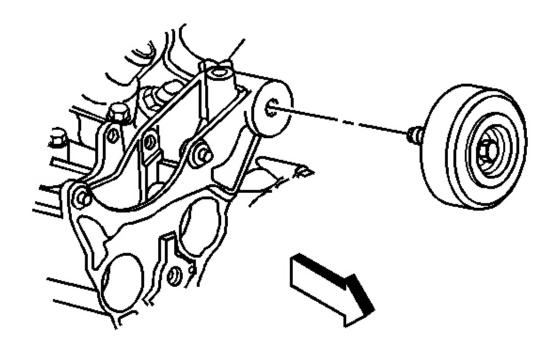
Drive Belt Right Idler Pulley Courtesy of GENERAL MOTORS CORP.
